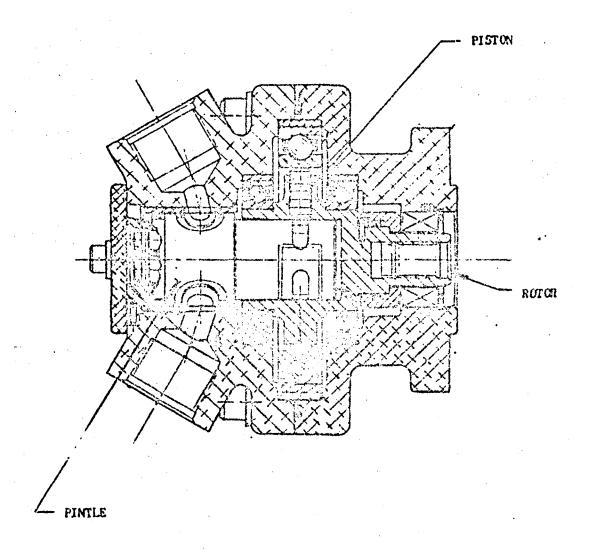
Radial Piston Pump - External Eccentric Rolling Contact Bearings
